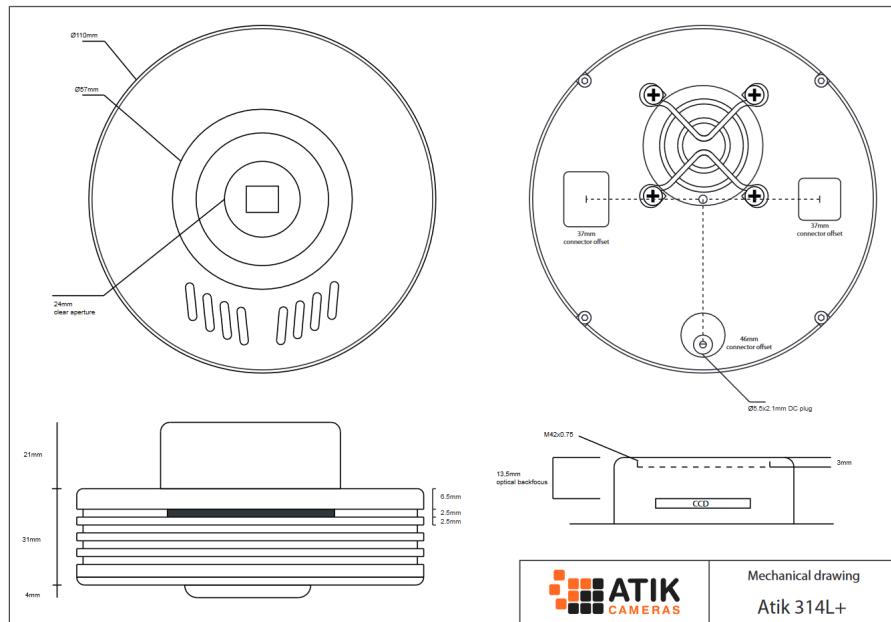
Technical drawing of Atik 315L + CCD sensor. (1)
